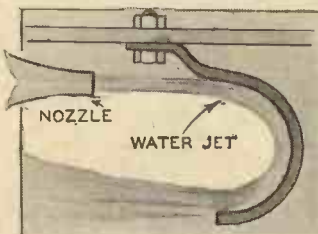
The buckets for the wheel may be bent out of flat iron or steel.
